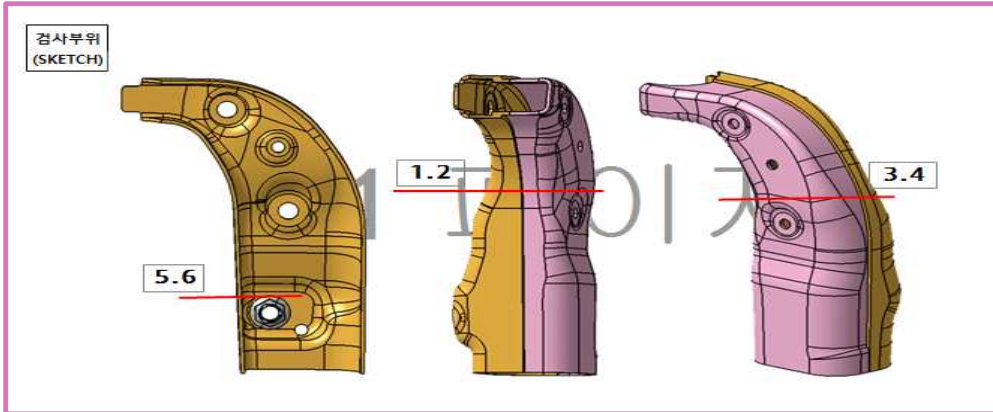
Measured location of welded joint in Multi-shape composite mold(RH) for the inspection
